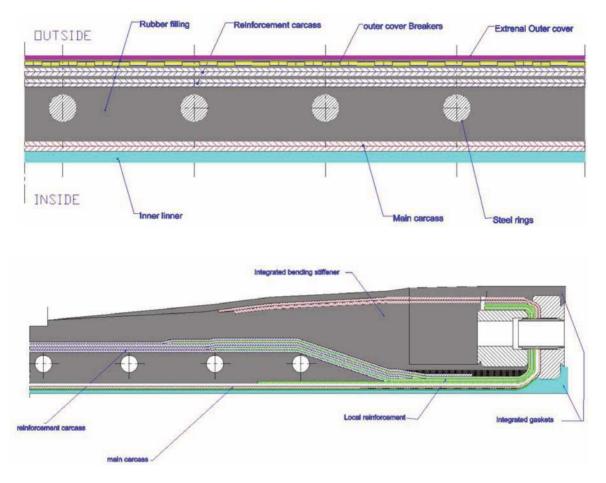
Typical Bonded Flexible Pipe—Loading and Discharge Hose
